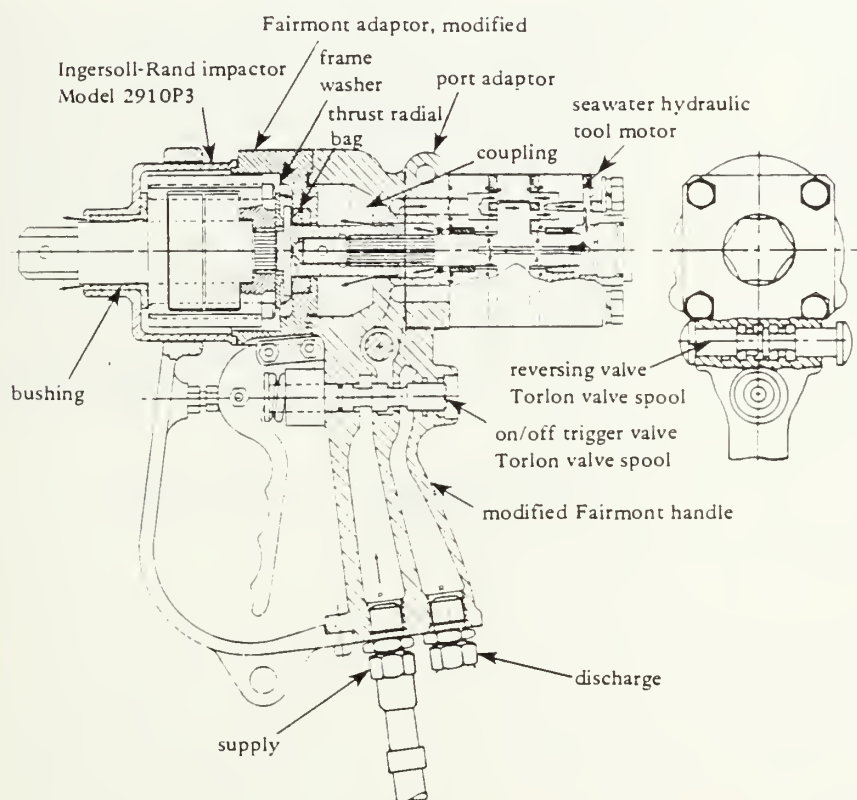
Impact wrench showing seawater fluid path for bearing lubrication within the impact mechanism.
